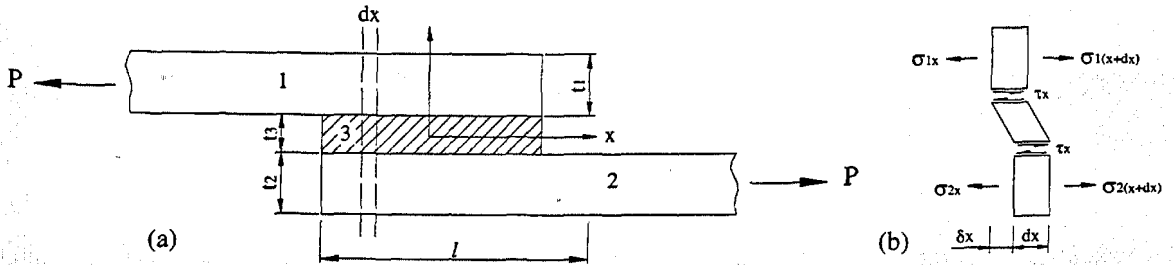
Volkersen's shear lag analysis (1938) showing (a) undeformed lap joint and (b) section through deformed joint with the assumed forces
